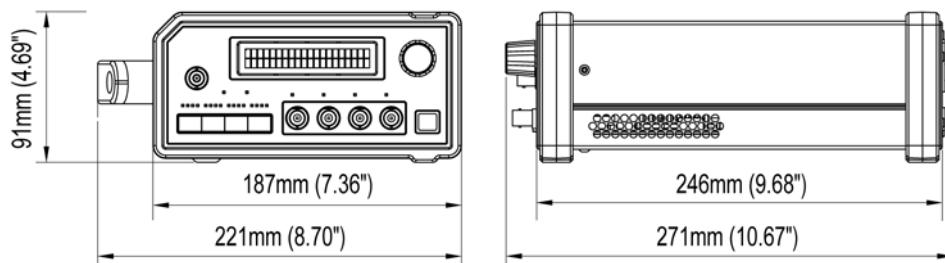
Dimensions ISOBE5600r/ISOBE5600m receiver
